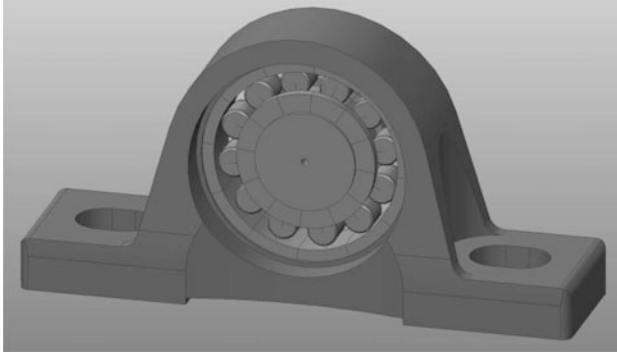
Model of simulated cylindrical roller bearing NU 206 with seating
